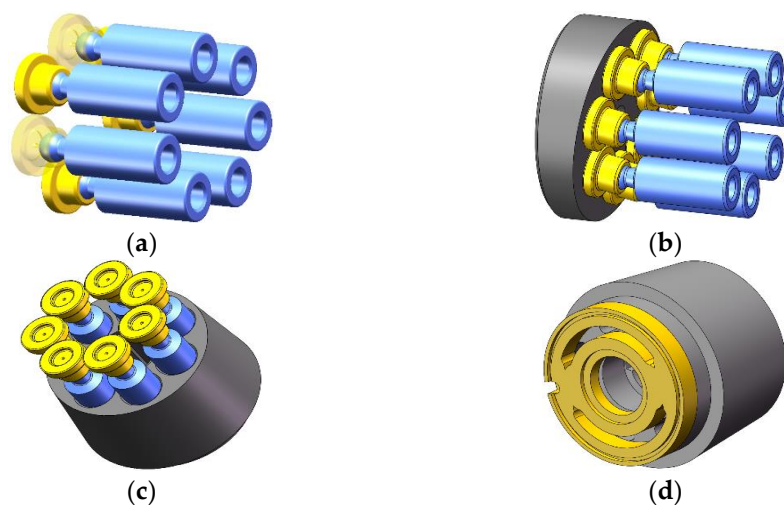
Main friction pairs in an axial piston pump. (a) Piston ball head and slipper, (b) slipper and swash plate, (c) piston and its hole, (d) cylinder and valve plate.
